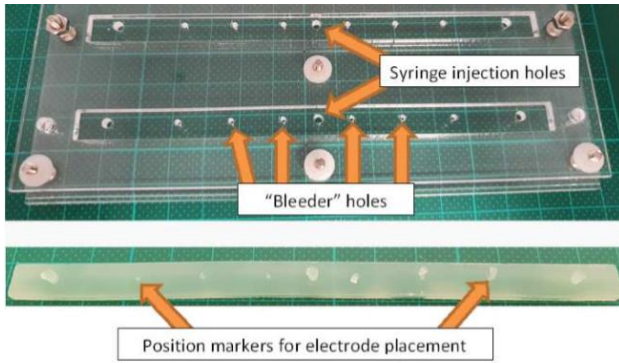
(Top) An acrylic mould used in creating the sample strips. (Bottom) An example stretch sensor strip removed from the mould.
